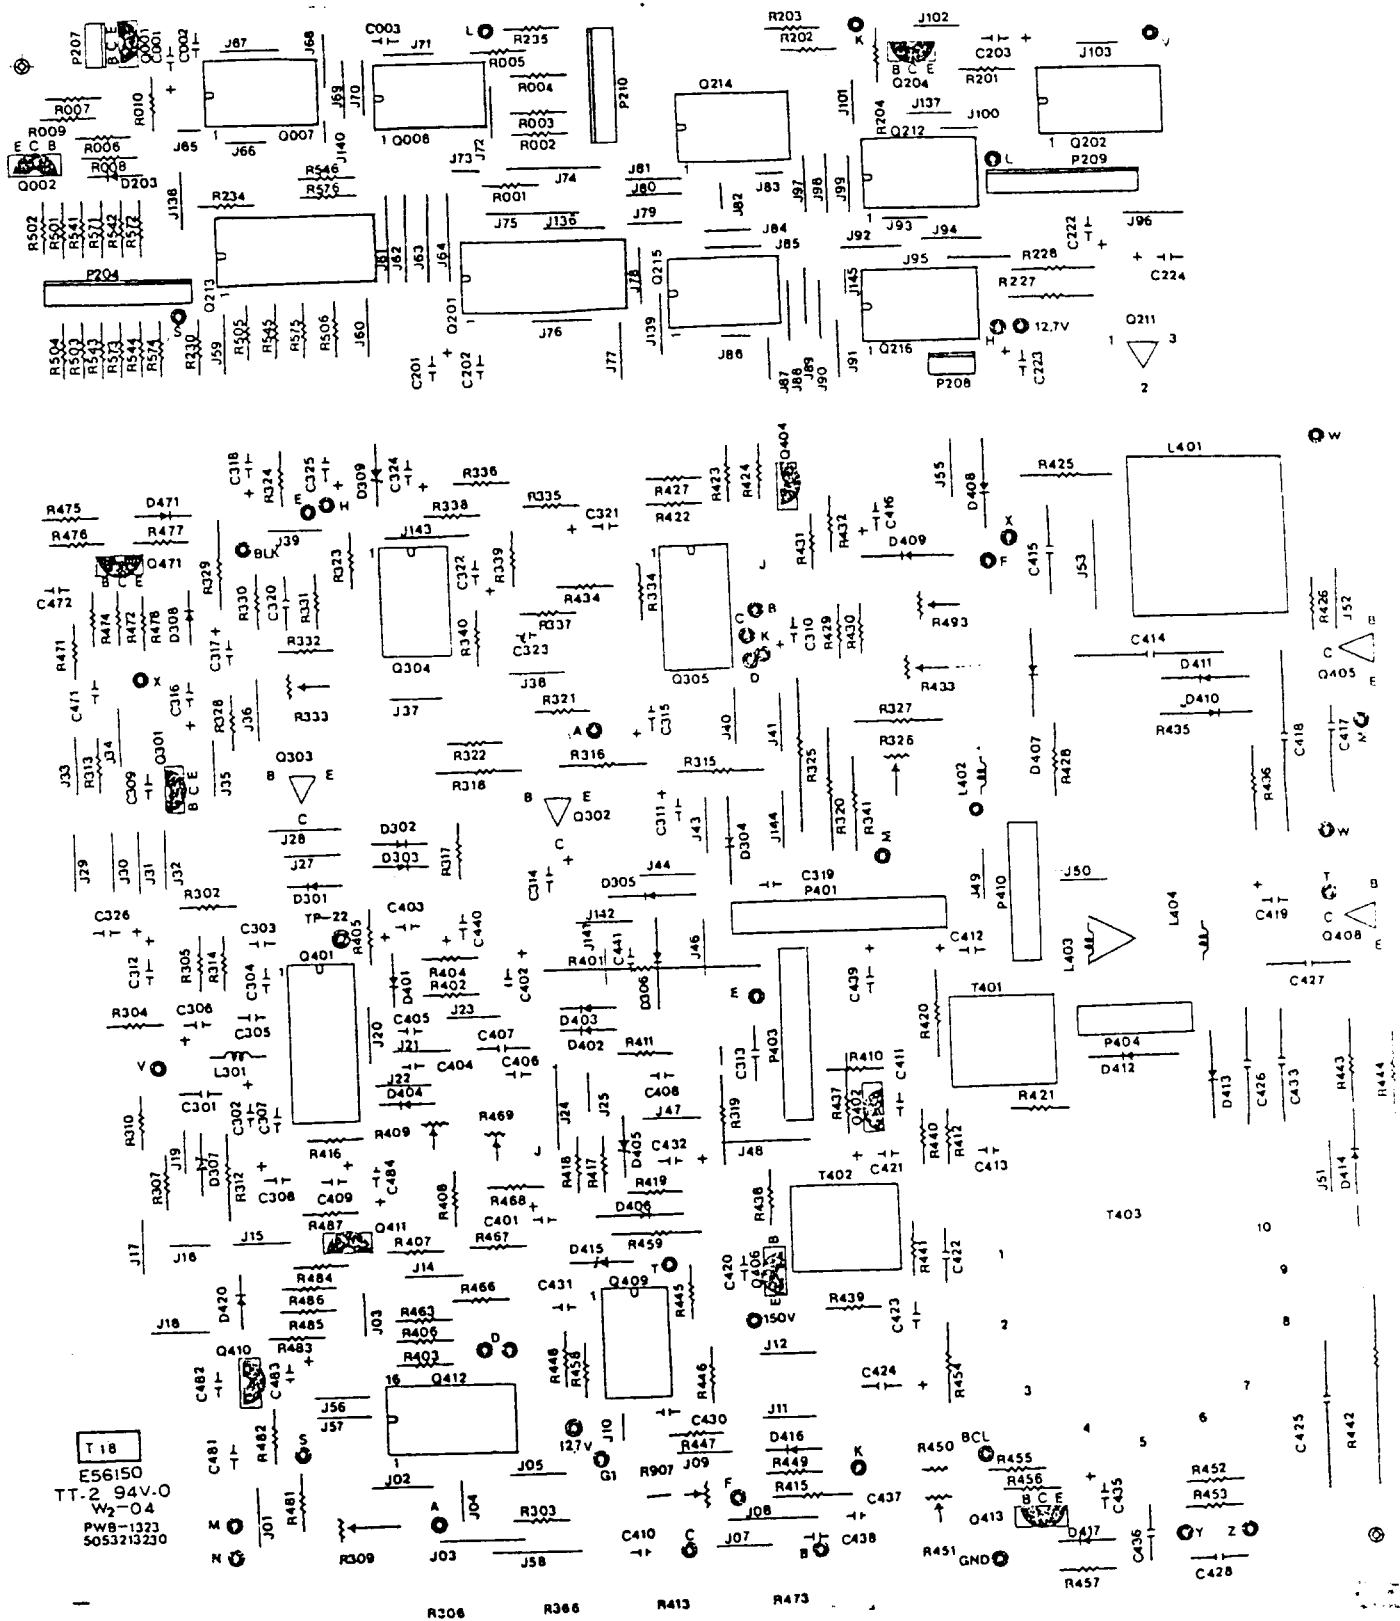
PCB-MAIN COMPONENTS LAYOUT
